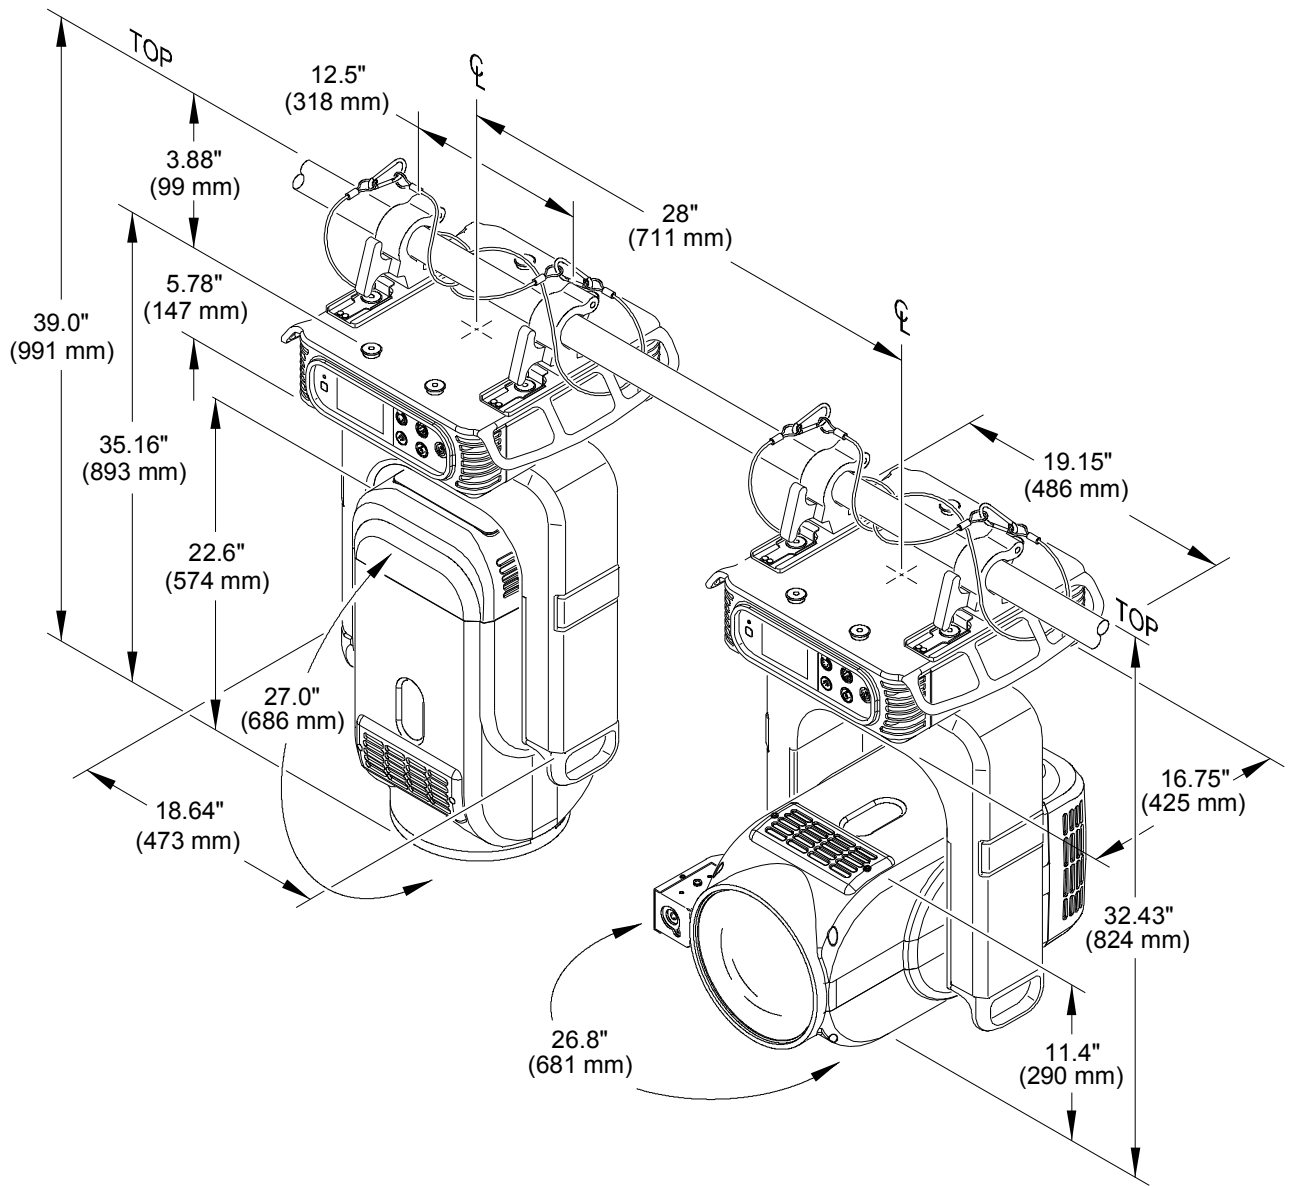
GC Best Boy Hanging Configuration and Dimensions
